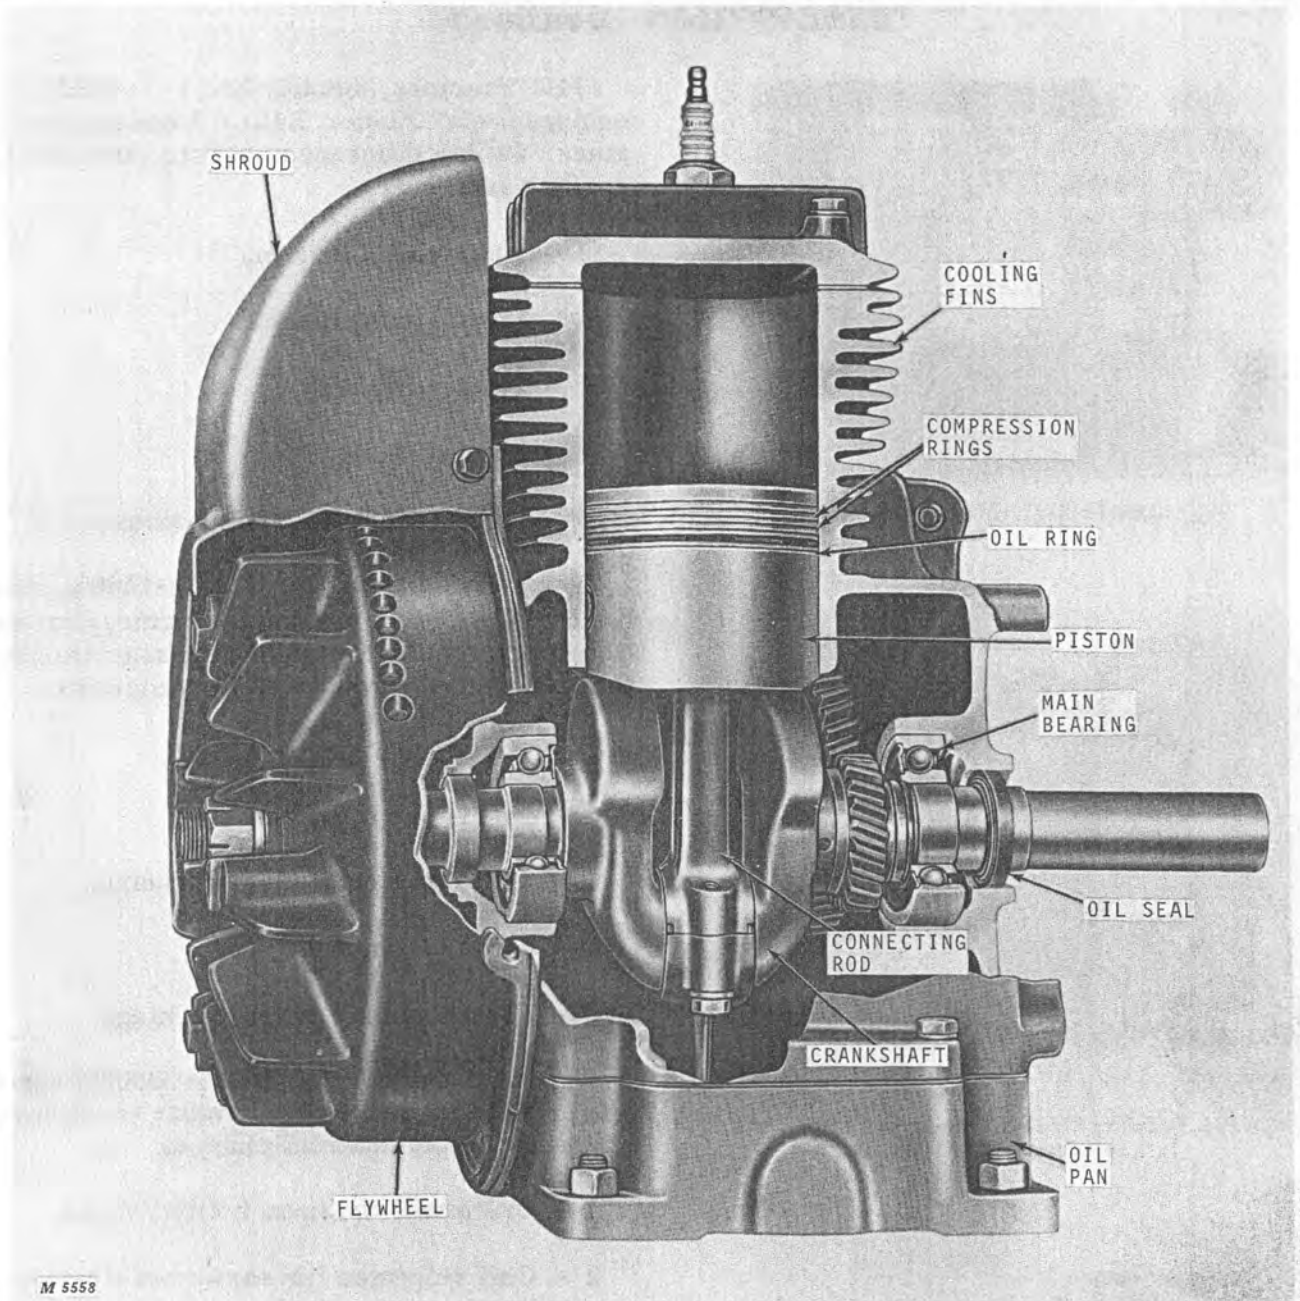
Cutaway View of Kohler K181S Engine Showing Piston, Crankshaft and Bearings
